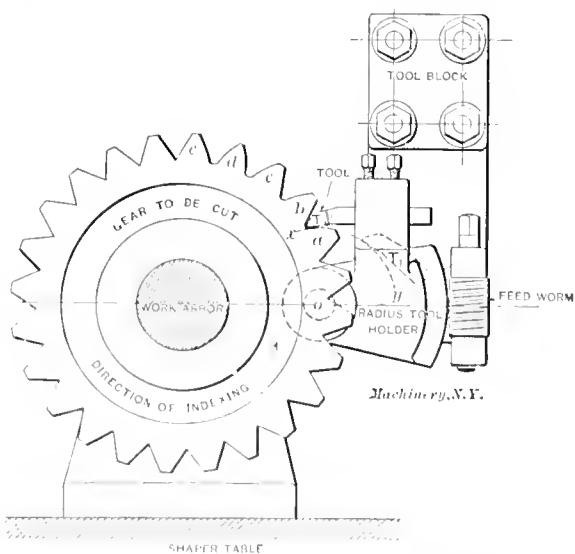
The Odontographic Principle, which approximately outlines the Tooth Form by Mechanical Means.
